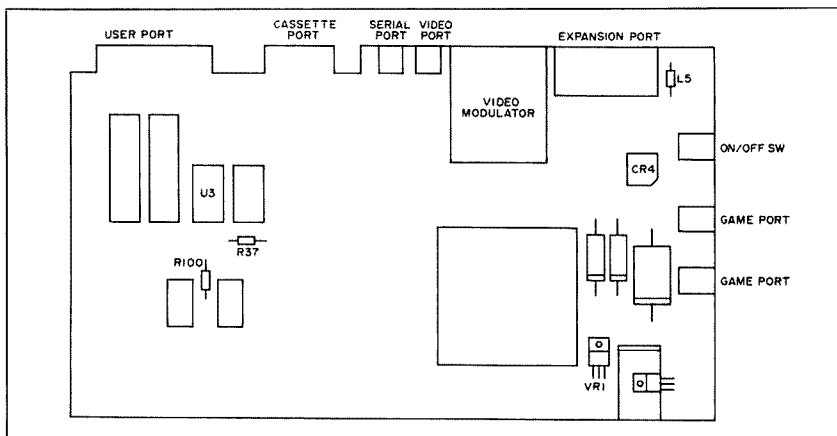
New style board. Notice that L5 and R100 are positioned differently. The RFI shield is made of cardboard.
